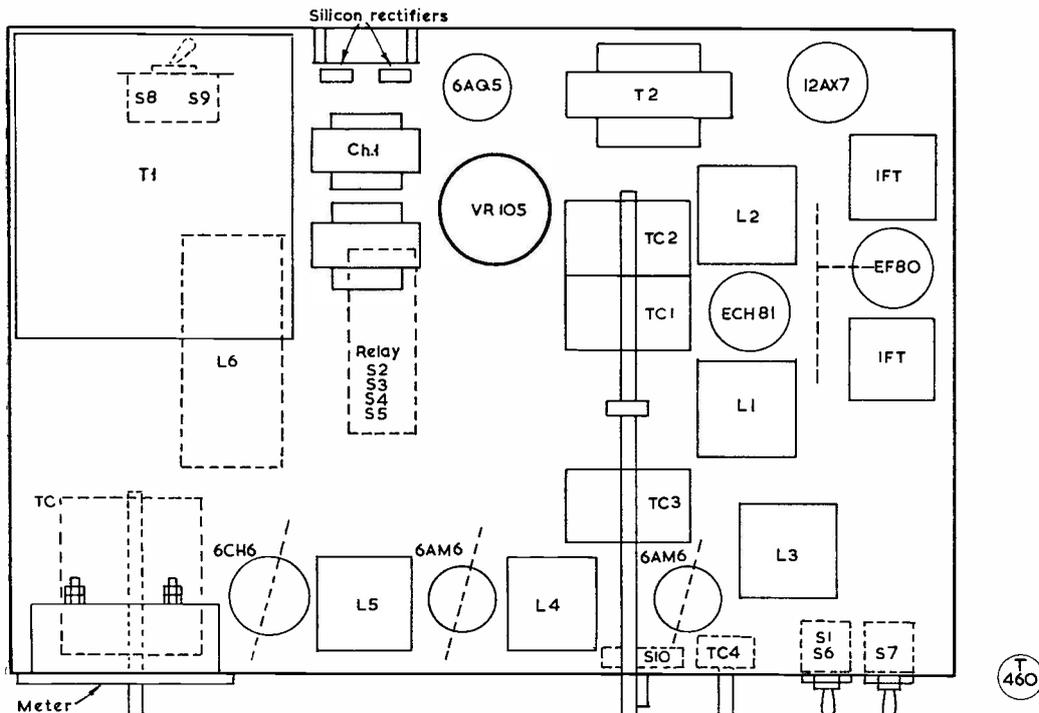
A suggested general layout arrangement for the Top Band transceiver, to incorporate the circuits of Fig. 1, Fig. 3, Fig. 4 and Fig. 5. Any chassis and panel dimension that will accommodate the main parts will meet the constructional requirement. However, if using the circuitry as outlined in the article by G3MHQ, with the values given in the table (on which there is a good deal of tolerance) it would be as well to adopt this layout.
